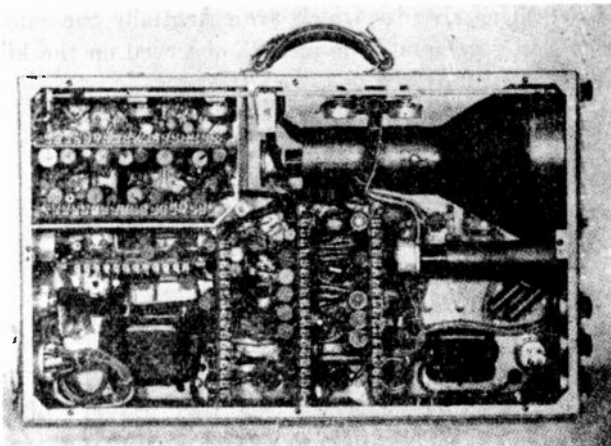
Camera-control unit—circuit-component side, cover removed.
